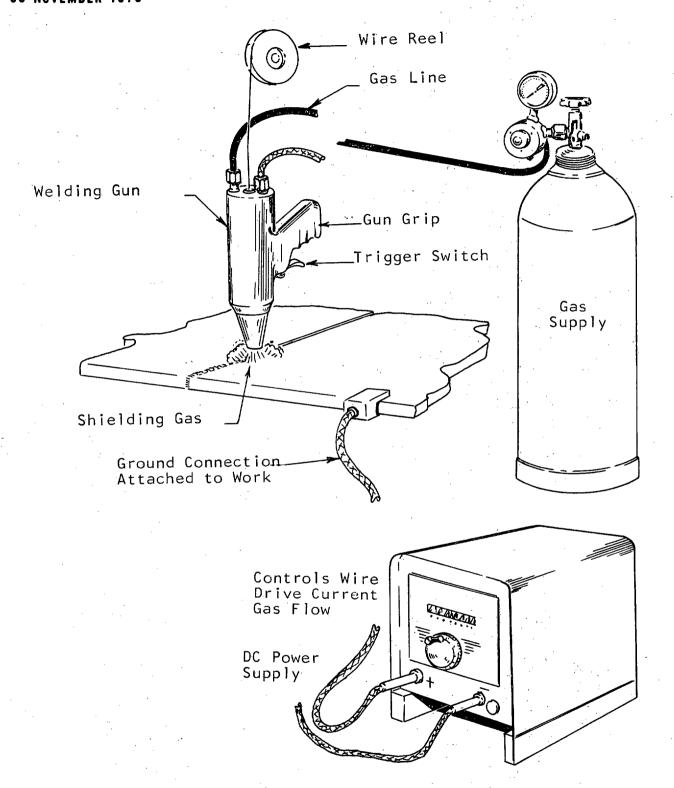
The Gas Metal-Arc (MIG) Welding Process
